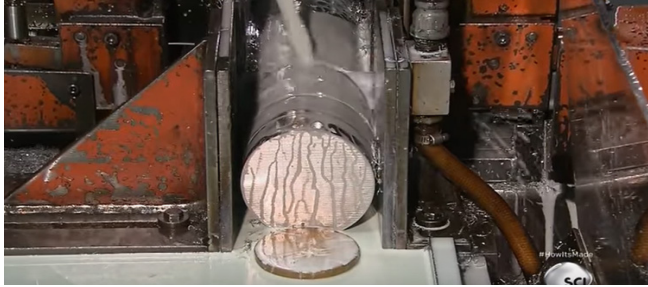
Valve process steps. cutting, milling, polishing, checking (The Specialty MFg Co).
